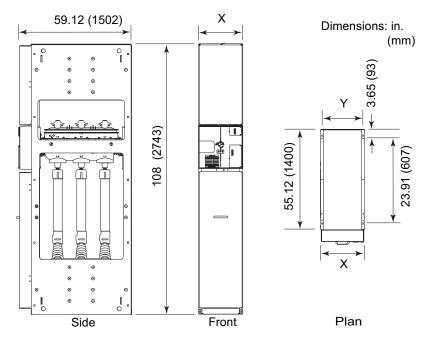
Side, Front, and Plan Drawings—Indoor (Application A)
